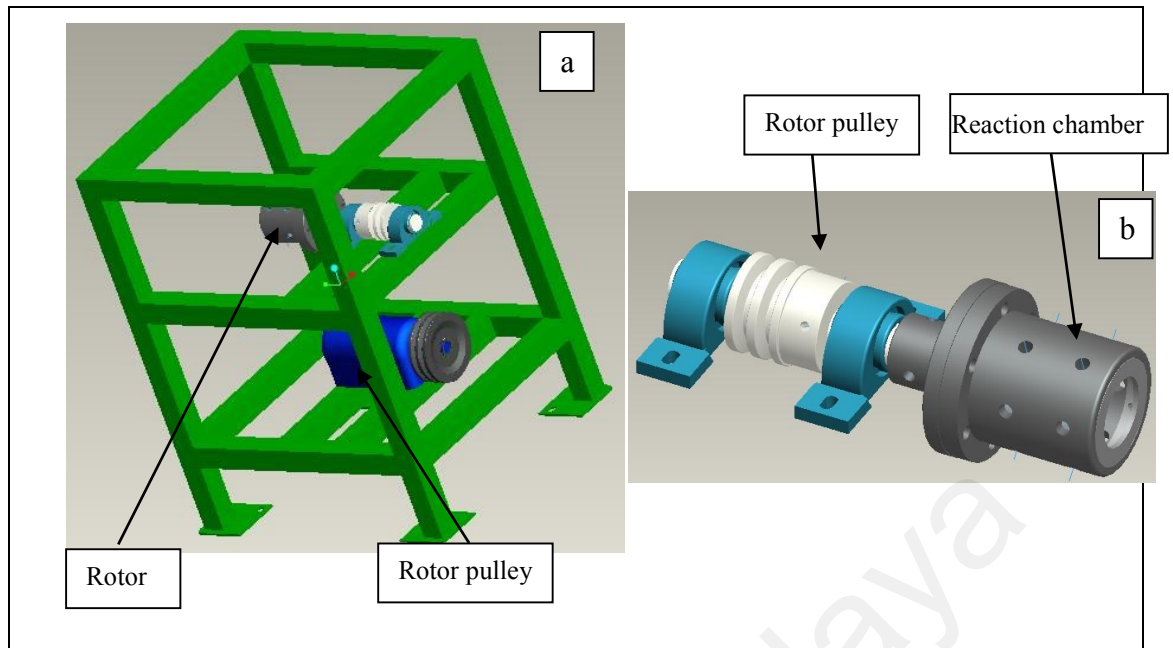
(a) Final rotor, motor, and components assembly; (b) the main chamber (reaction chamber) and rotor components
